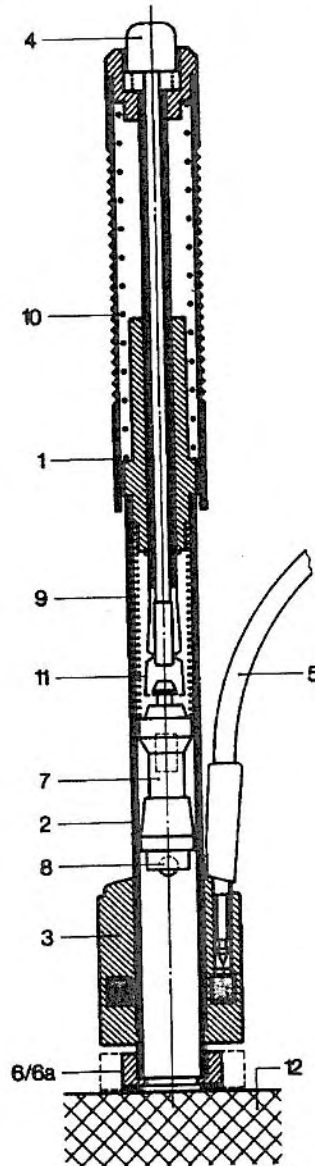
Schematic design of the Equotip impact devices: (1) loading tube; (2) guide tube; (3) coil with coil holder; (4) release button; (5) connection cable leading to the indicating device with coil plug; (6) large support ring; (6a) small support ring; (7) impact body; (8) spherical test tip; (9) impact spring; (10) loading spring; (11) catch chuck; and (12) material to be tested.
